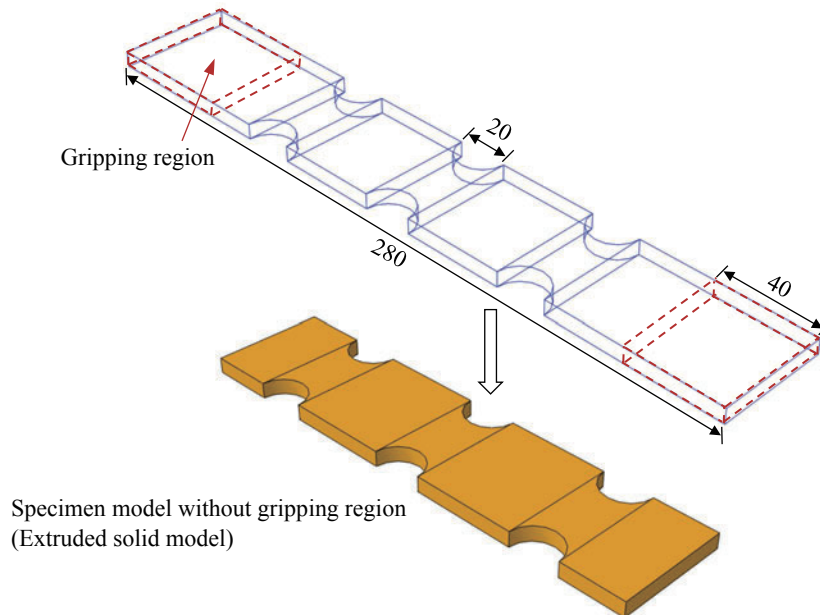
FE model of notched steel specimen (all dimensions are in mm)
